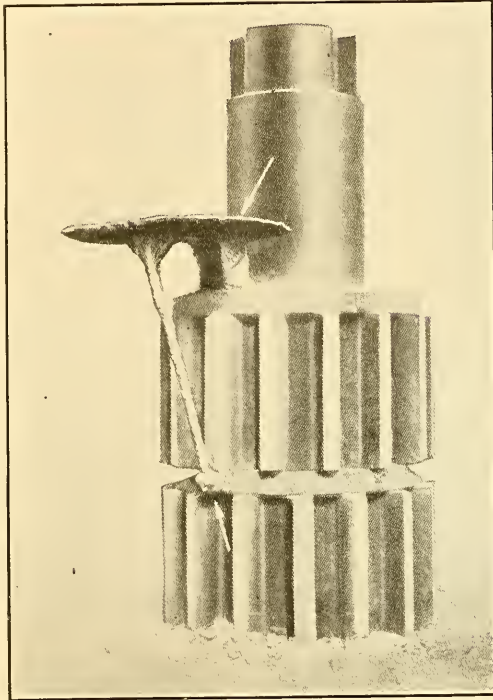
Finished Weld, Showing Metal in Pouring Gate and Riser.
